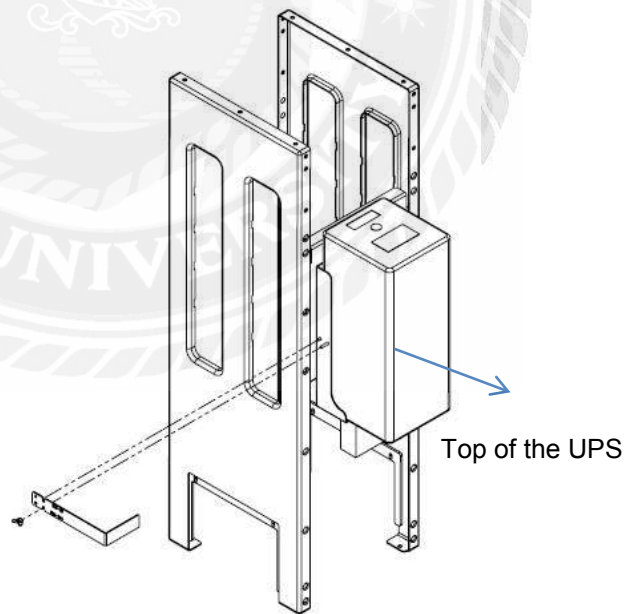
Location of the Wing Nut to be Tighten on the UPS Mounting Bracket
